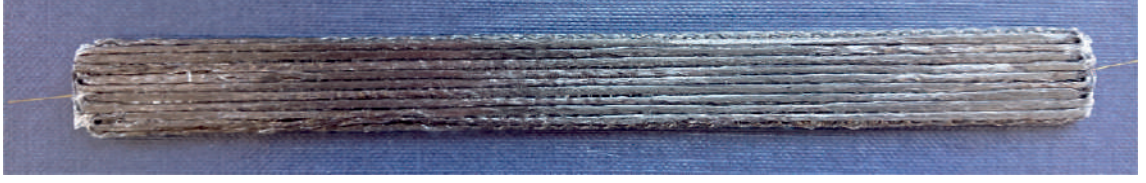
3D printed CFRP specimen containing FBG sensor
